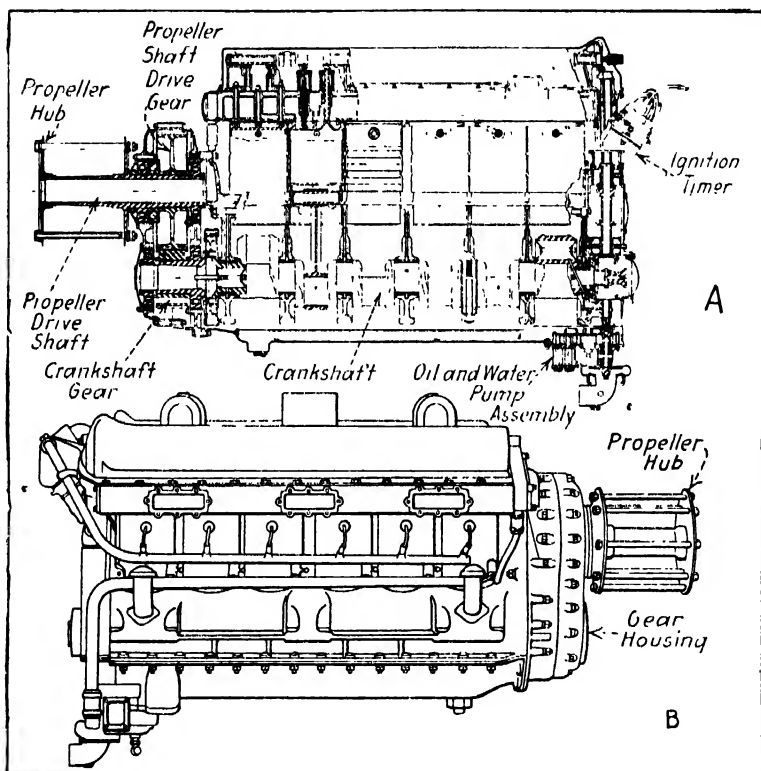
Longitudinal Section of Packard Aircraft Engine Model 2A 2500 Shown at A Depicts Important Parts, Especially the Propeller Drive Gearing. The External Appearance of the Same Engine is Shown at B. This Engine Develops 800 Horsepower.
